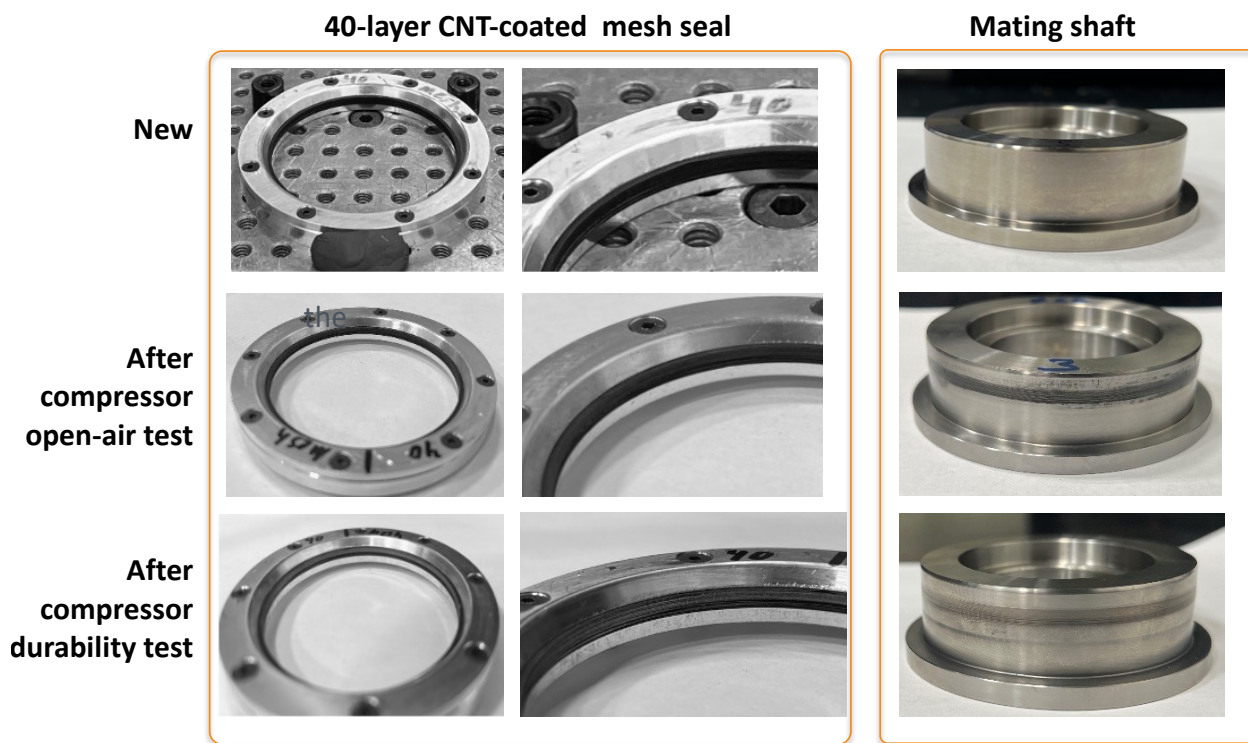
The 40-layer CNT-coated metal mesh seal (ID: 66 mm) and its mating shaft before and after the compressor open-air and durability tests.
